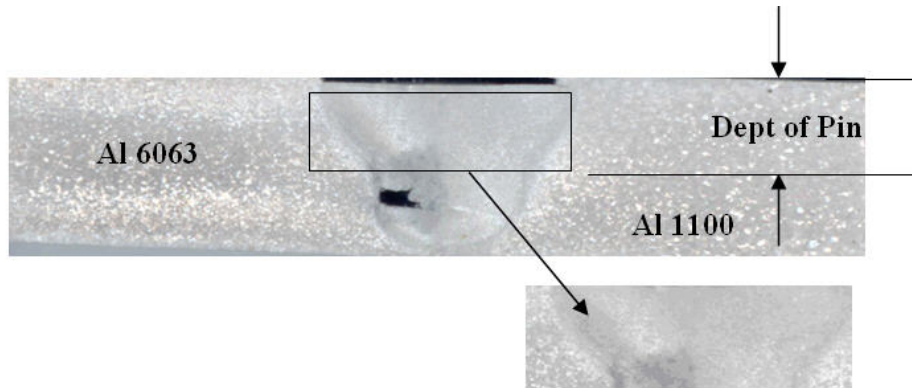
Partially completely of weld in Dept of Pin of sample on maximum Tensile
